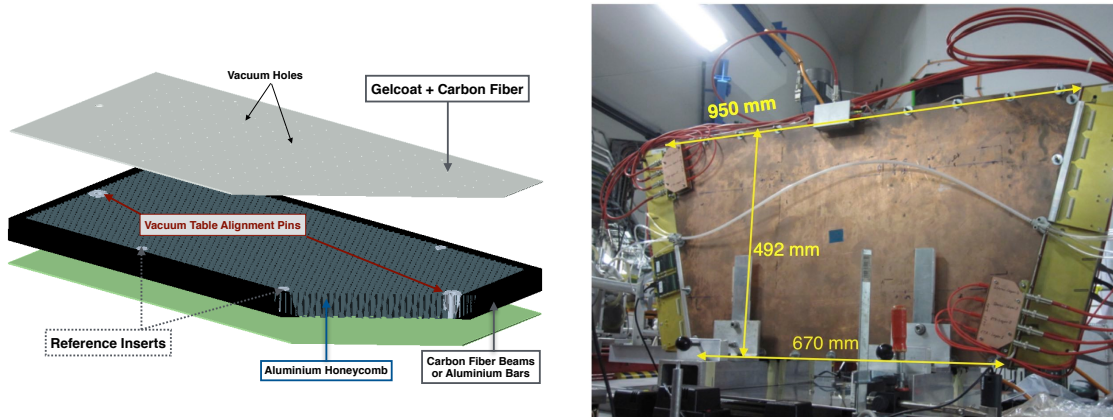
Schematic view of the vacuum table (left) and a photo of the one final assembled detector quadruplet equipped with electronics. (right)
